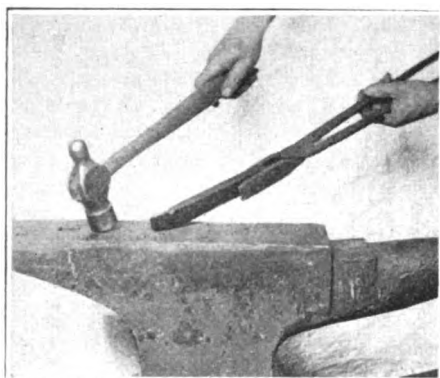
Method of Shaping or Redressing a Solid Turning Tool.
